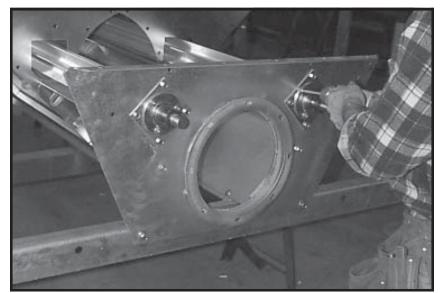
Tightening bolts on 1" meter roll assemblies at (rear) discharge bearing plate.
